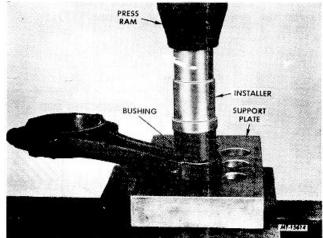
Installing Piston Pin Bushing in Connecting Rod
